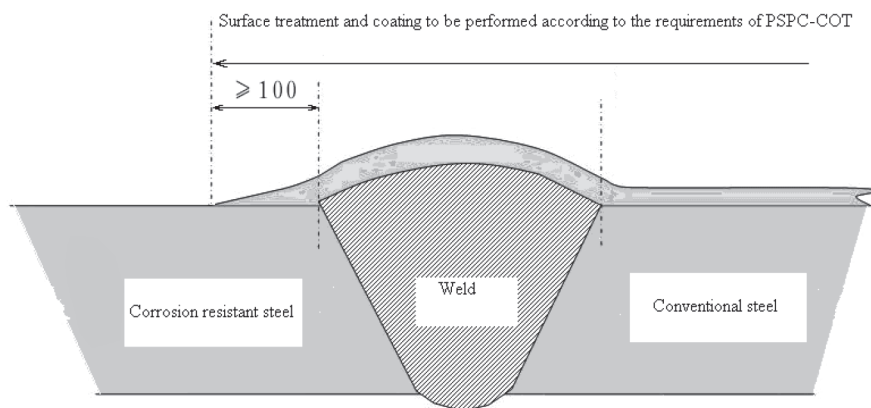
Welding of corrosion resistant steel to conventional steel
